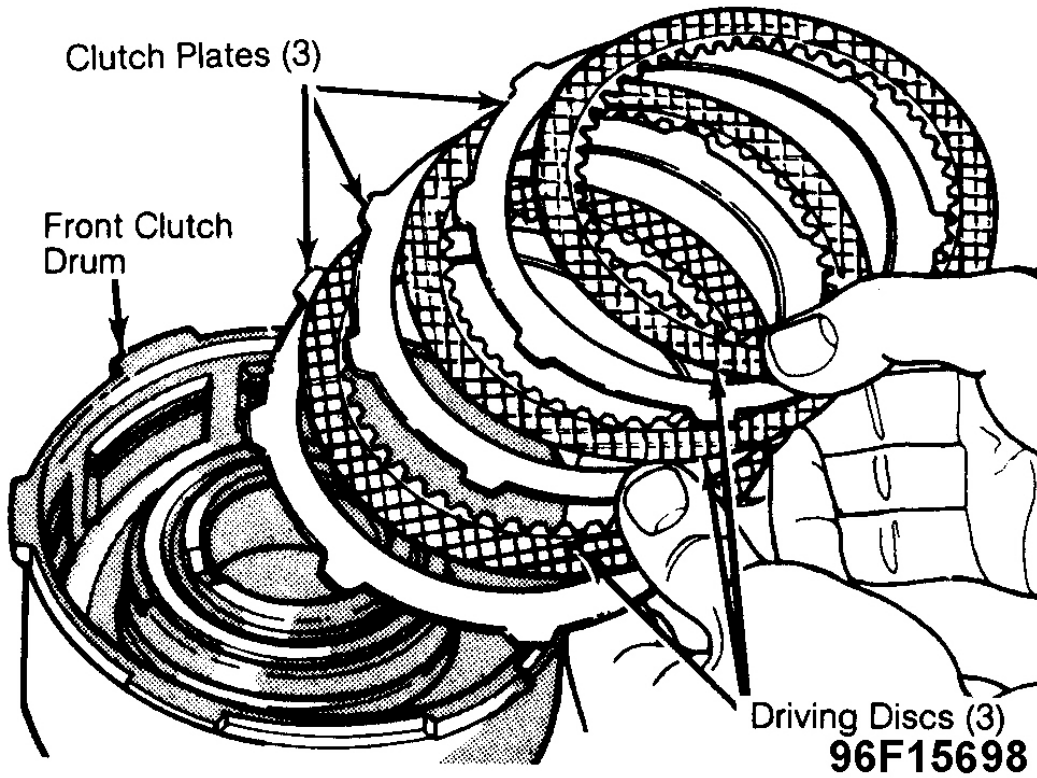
Install Front Clutch Plates & Driving Discs Into Clutch Drum
